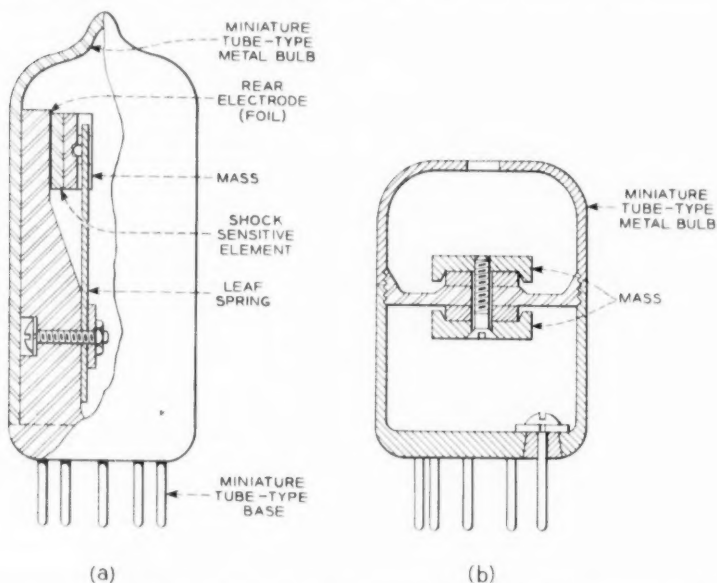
(a) Radial miniature tube compression type accelerometer and (b) radial miniature tube shear type accelerometer.
